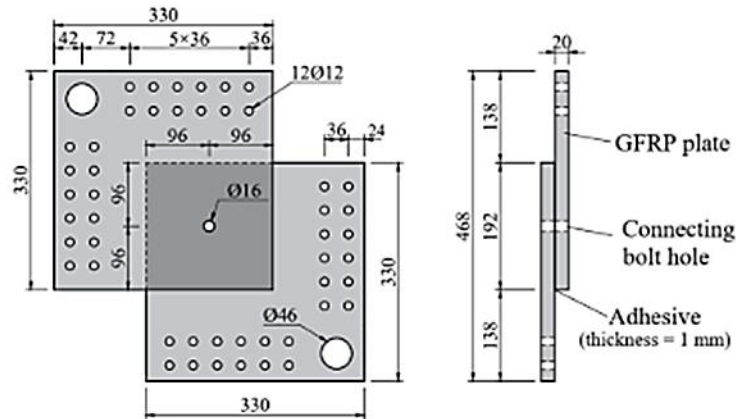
Bolted joint using a composite plate with an adhesive joint [56]
